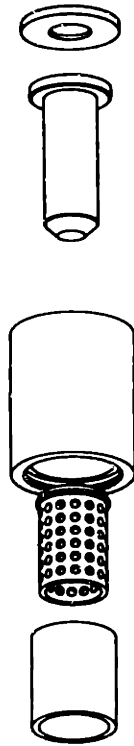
Kinematic coupling using die-set bushings and ball cages for large out of plane travel.
